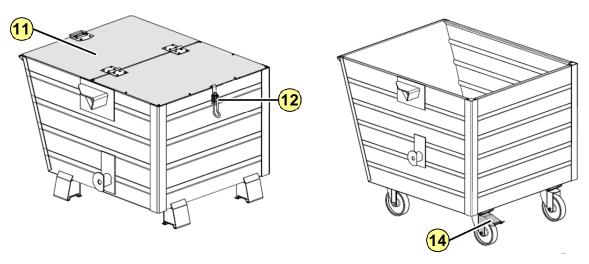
Stacking tipper with cover or steering caster and lock
